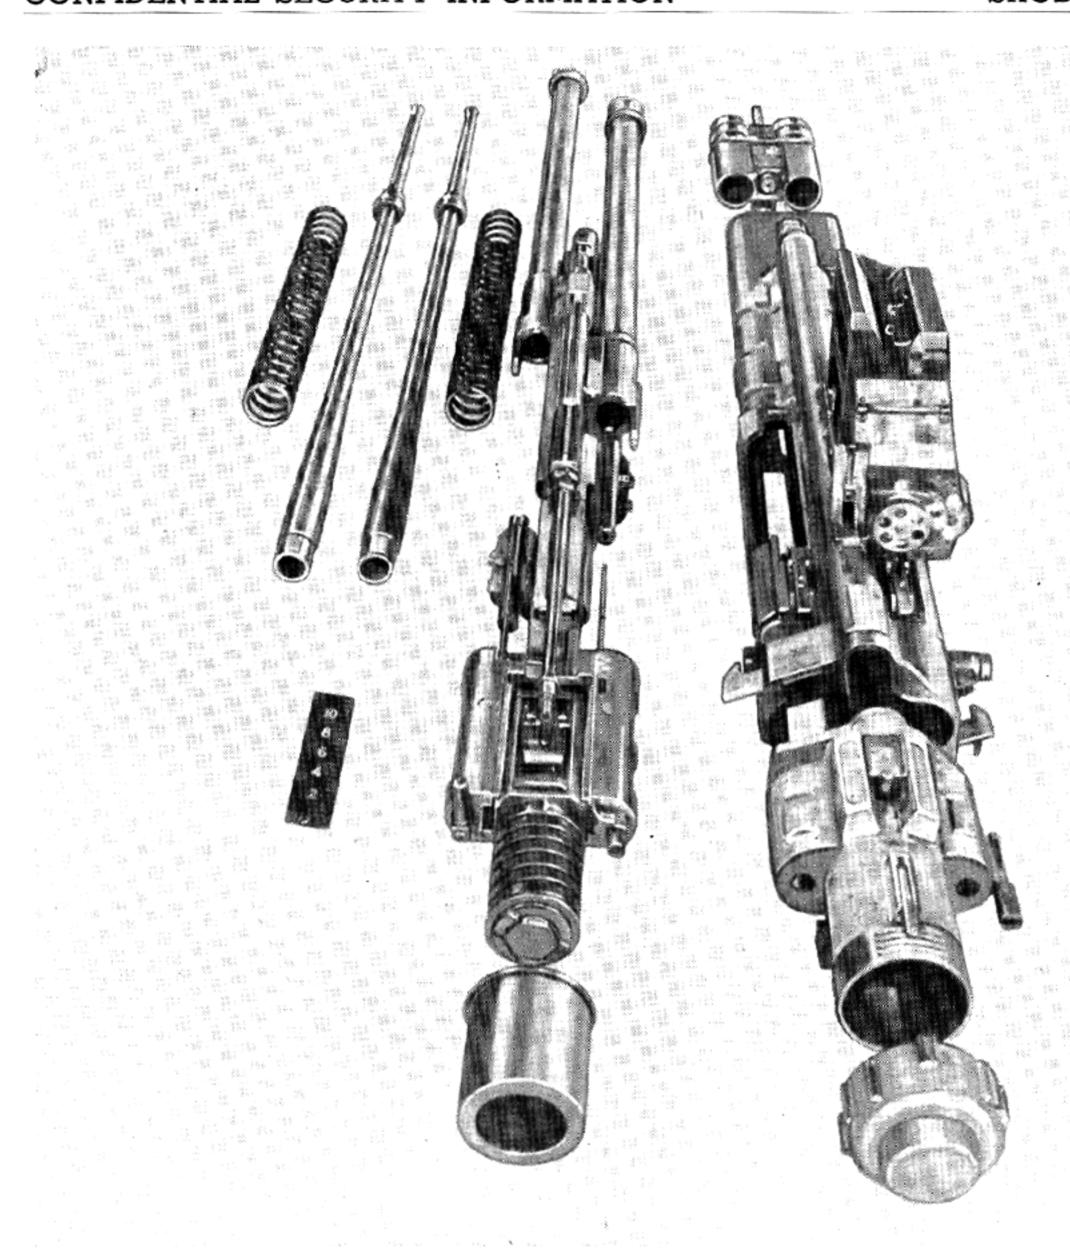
Skoda 30-mm Automatic Gun, FLAK Model B, stripped, rear view.
